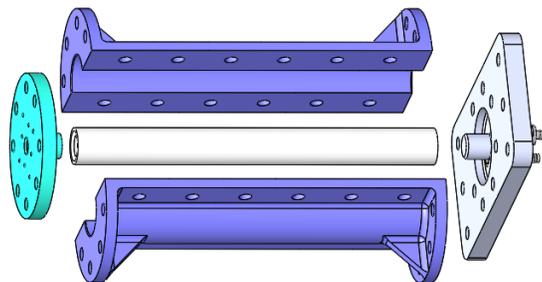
Five-part silicone tube mould design, rotated to conserve space.
